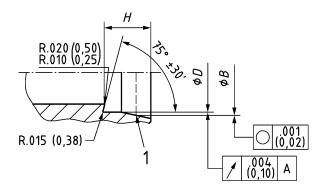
Configuration, dimensions and tolerances of fitting end design, style B (same as style G except as shown)
